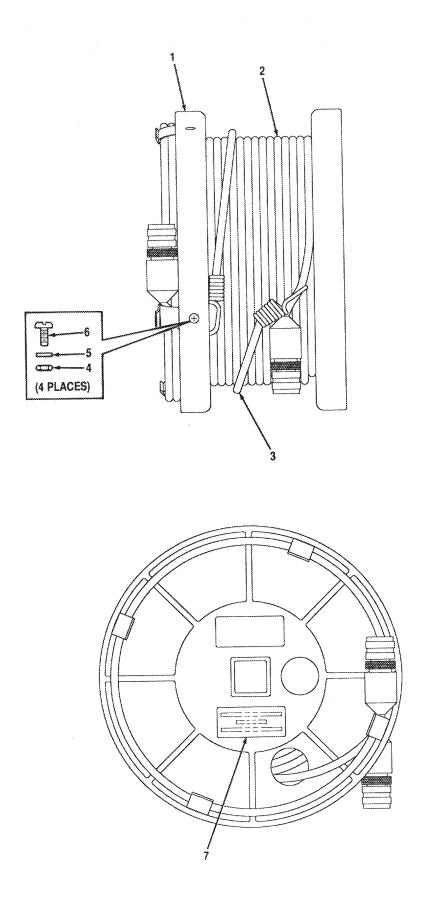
A. Cable Assembly and Reel, CG-3883/G (A3034219)
